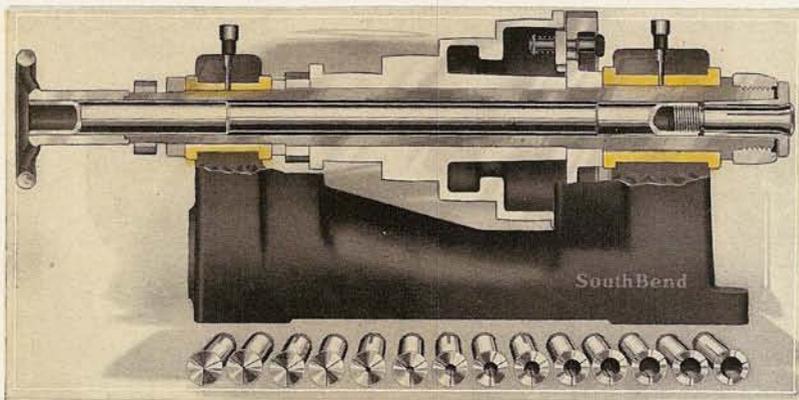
A cross section of the Headstock showing Hand Wheel Draw-in Collet Chuck
